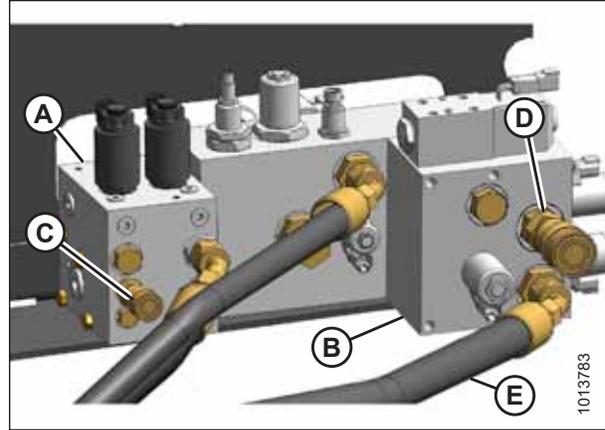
Manifolds with Reverser Manifold Configured for Auger Header
